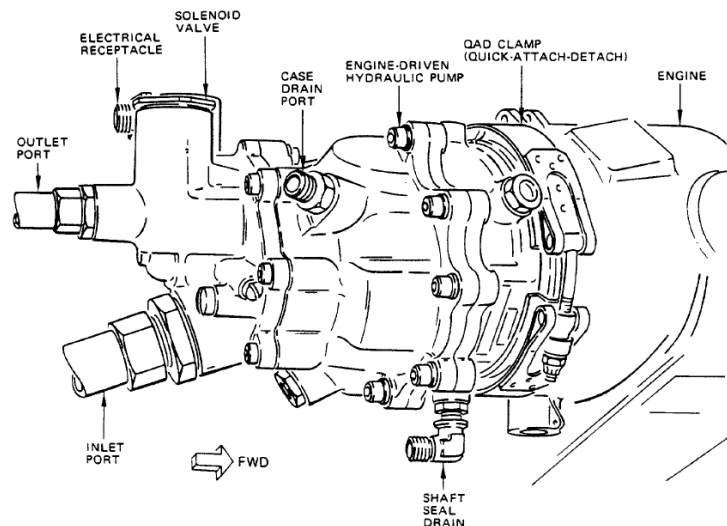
Engine-driven pump (In-line type) (Fuente: B727-AMM)
